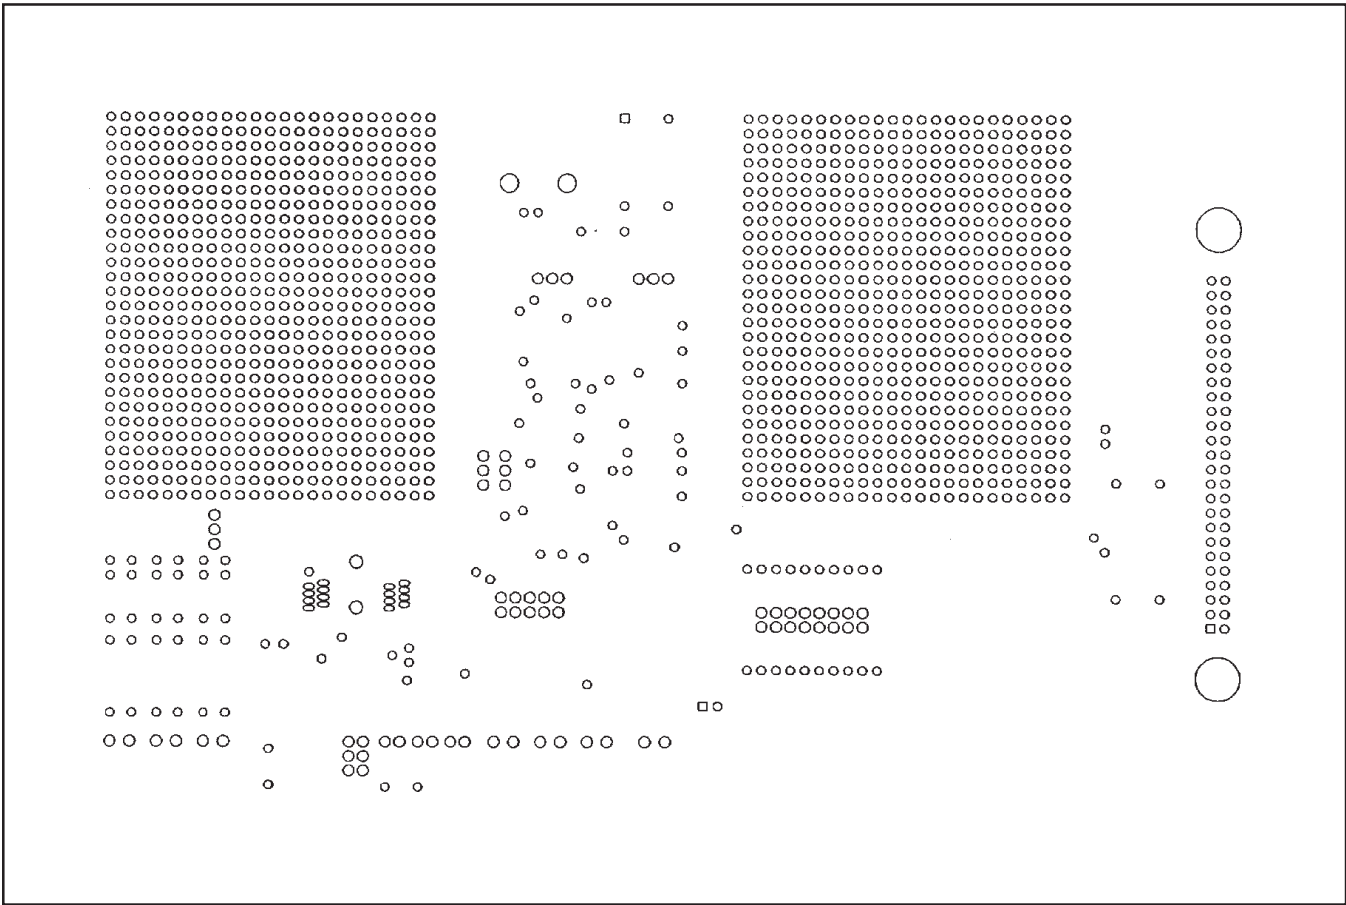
Bottom Side Soldermask of the DEM-ADS7843E/45E Demonstration Board.
